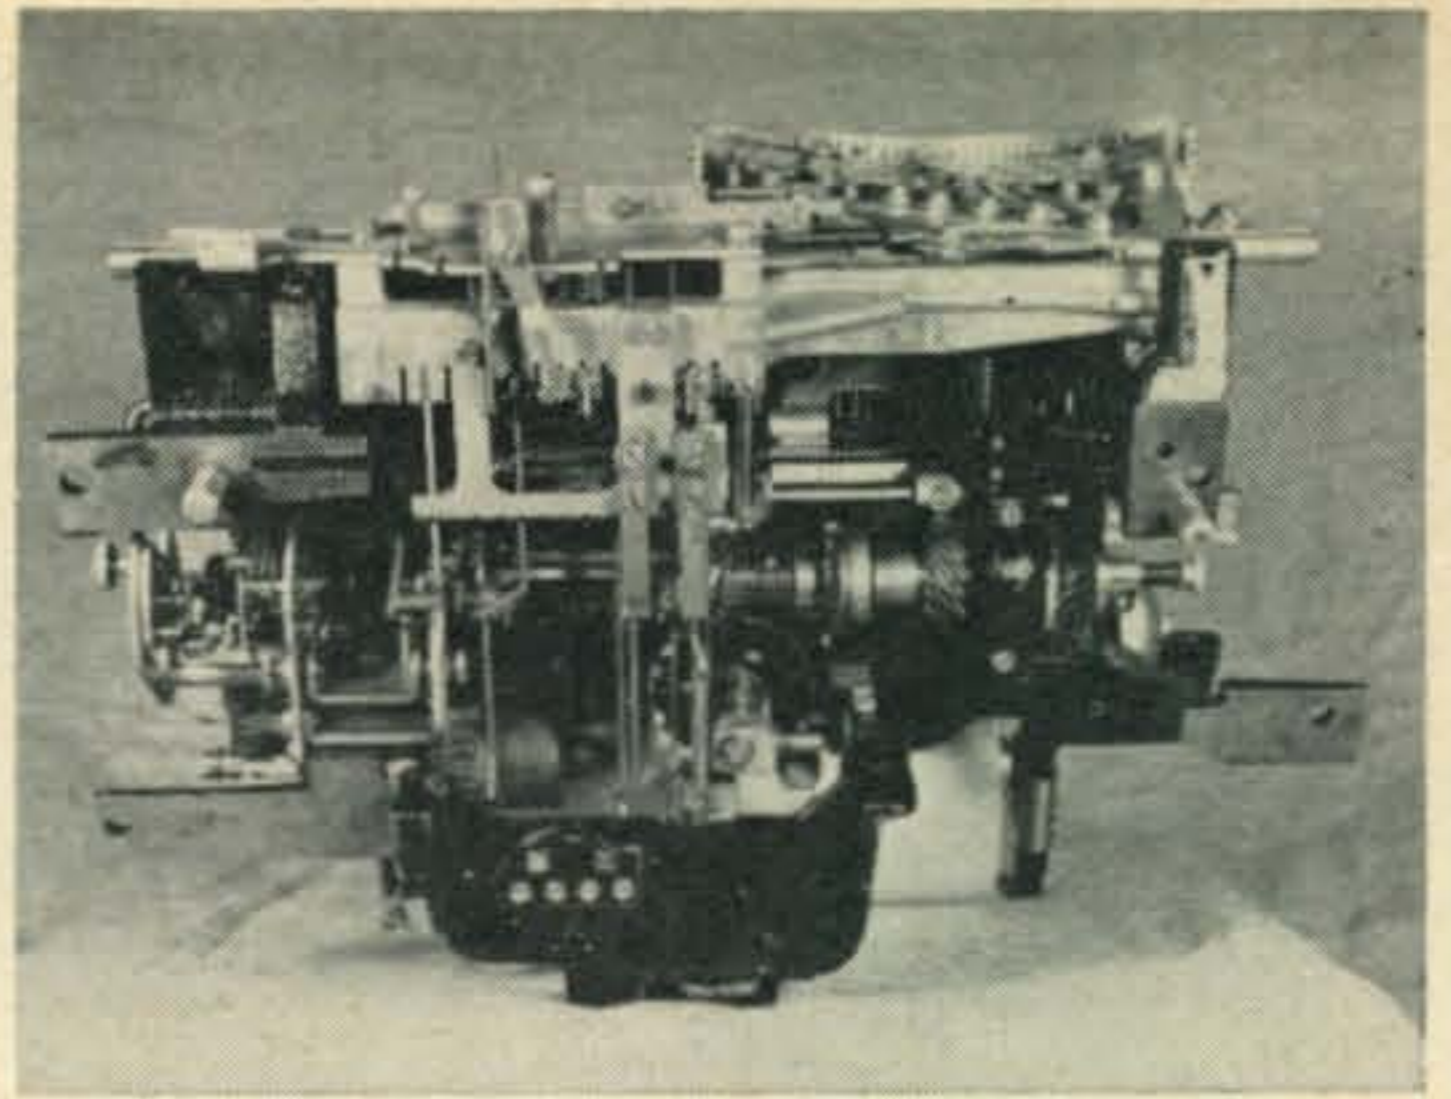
Bottom view of the Model 15 receiving mechanism.
